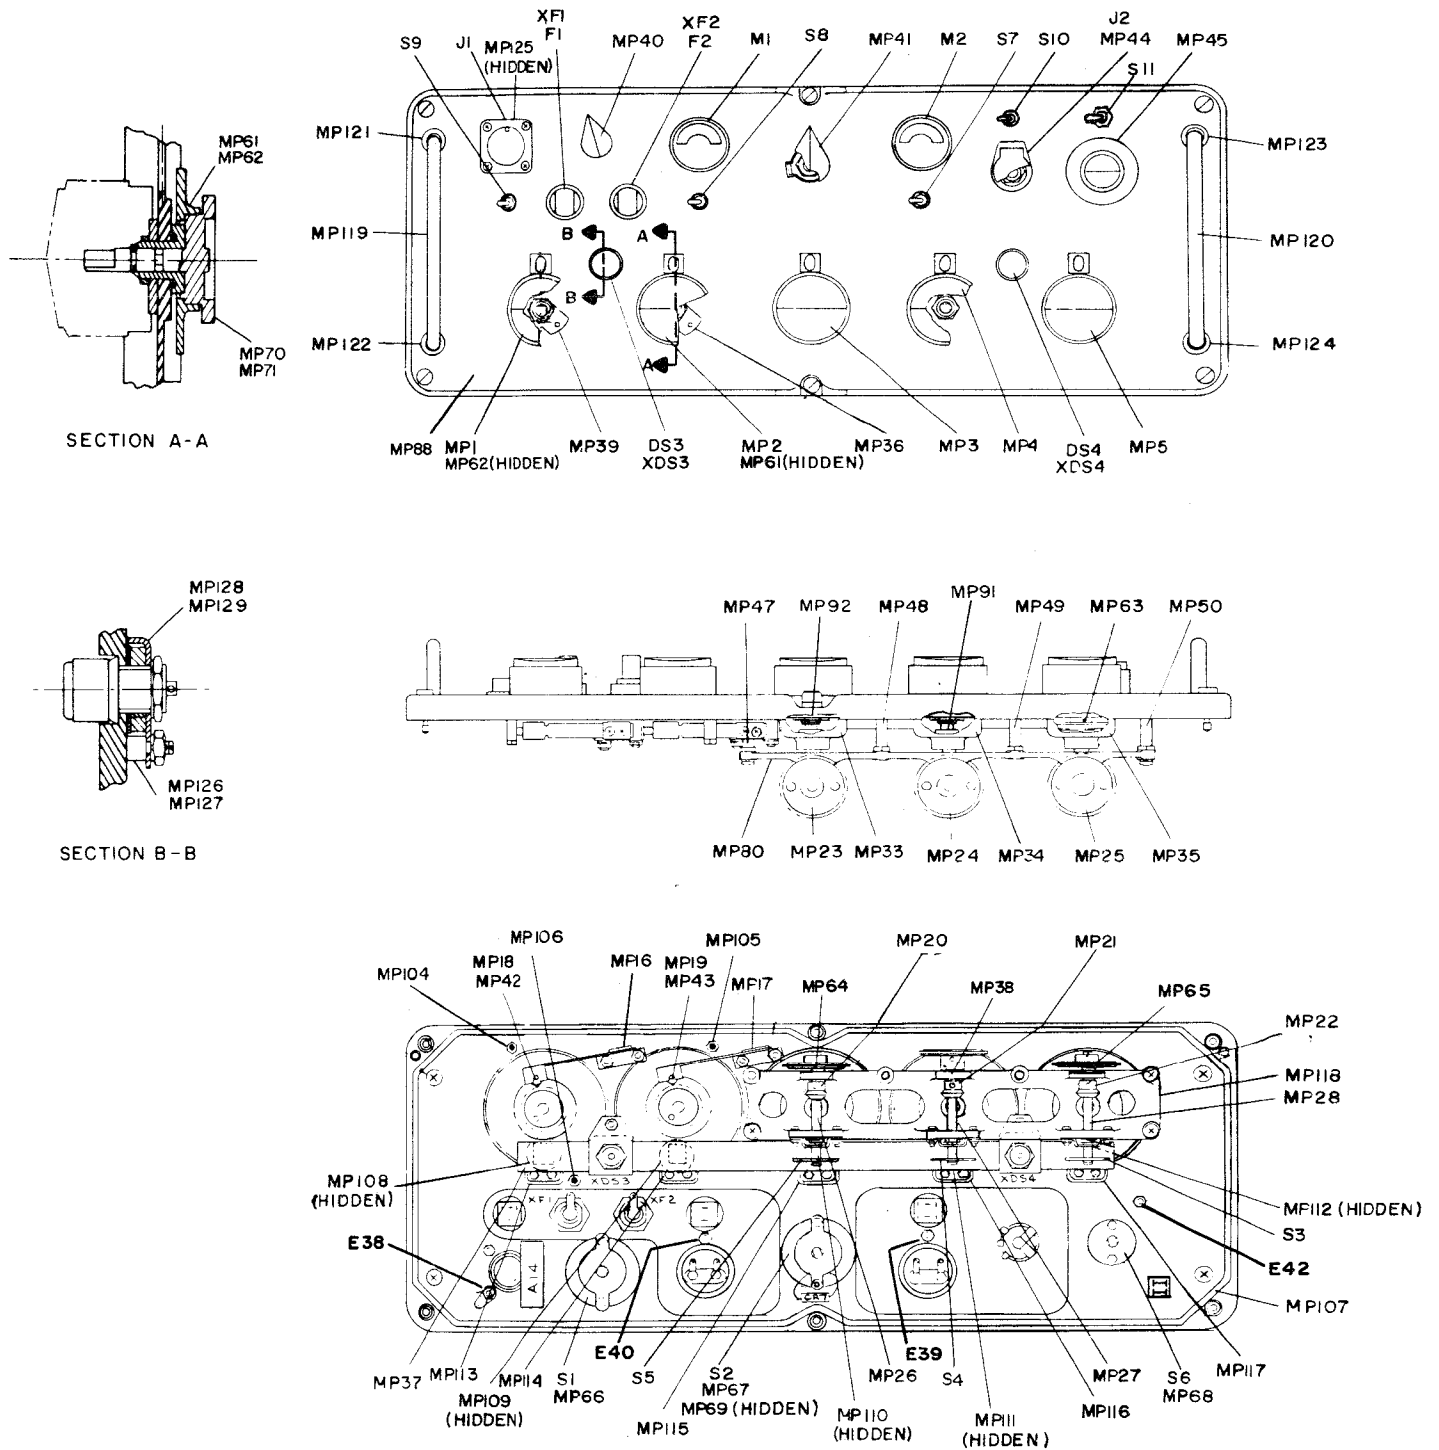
Front Panel Assembly (P/O A2), Component Locations
